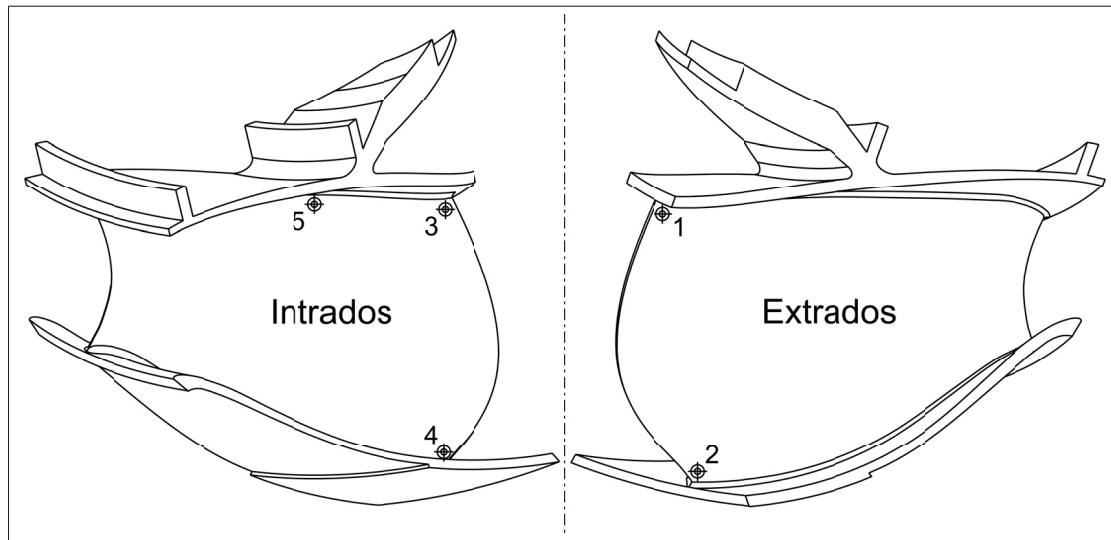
Position of the gauges placed on the hydraulic turbine blade during measurements.
